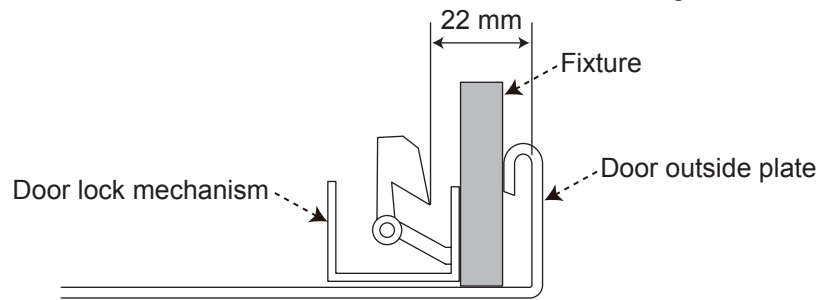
Installation of door lock mechanism unit (assembly)
